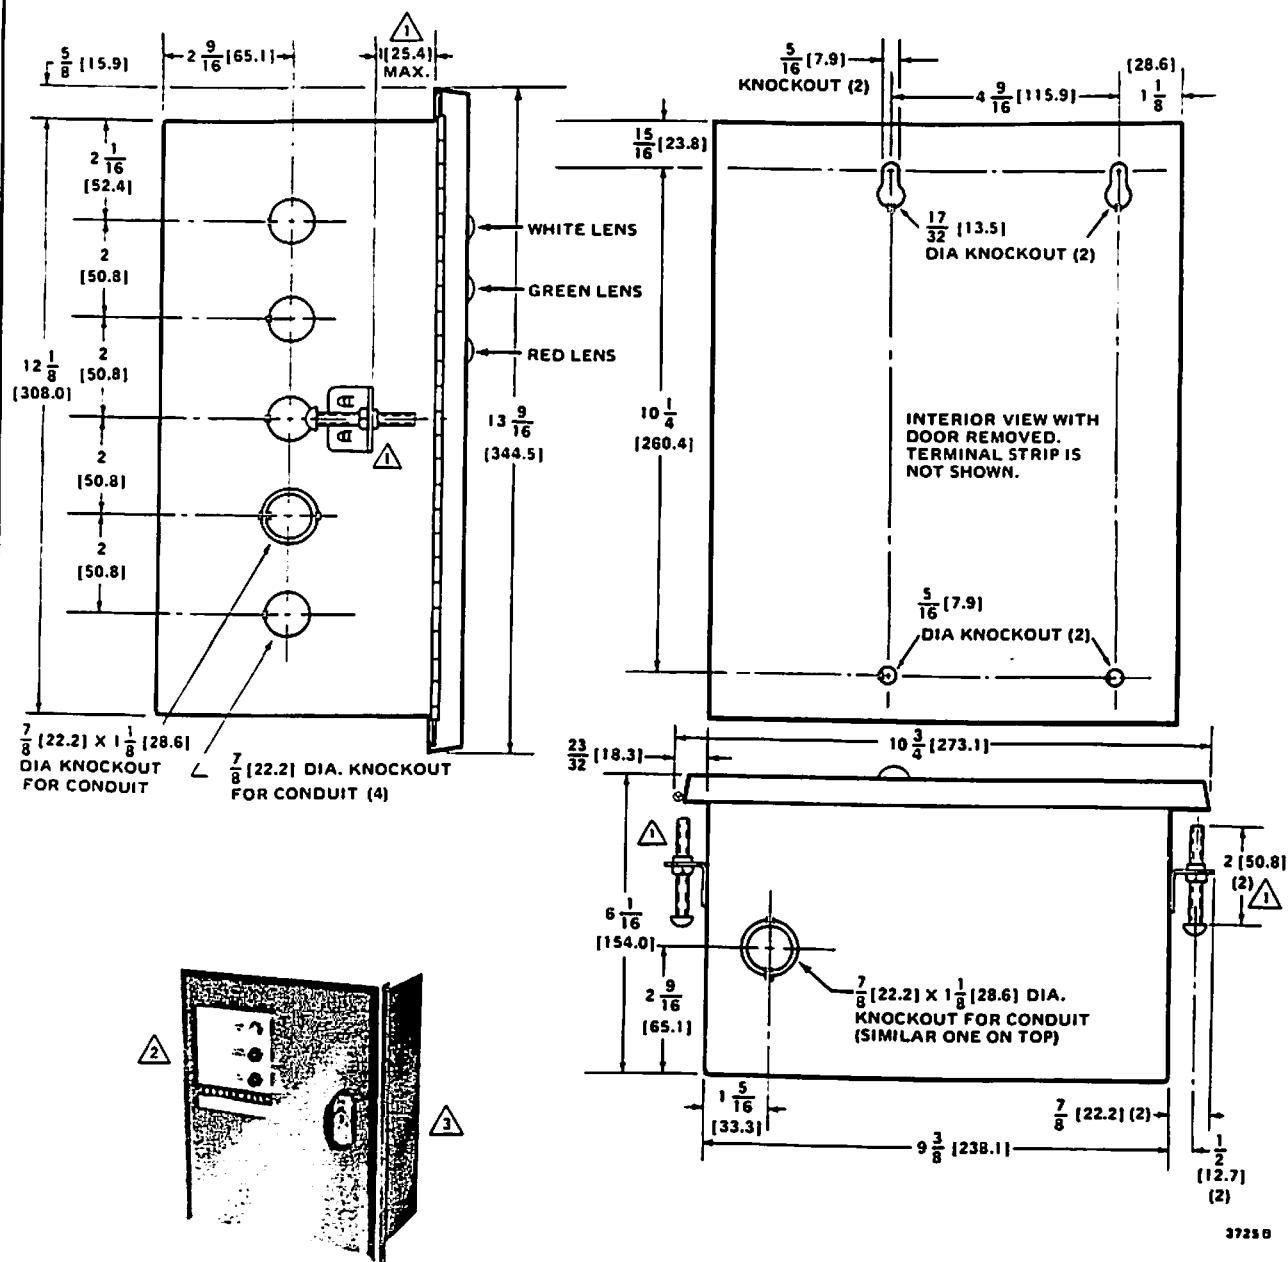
MOUNTING DIMENSIONS OF THE Q478A CABINET, IN INCHES [MILLIMETRES IN BRACKETS].
